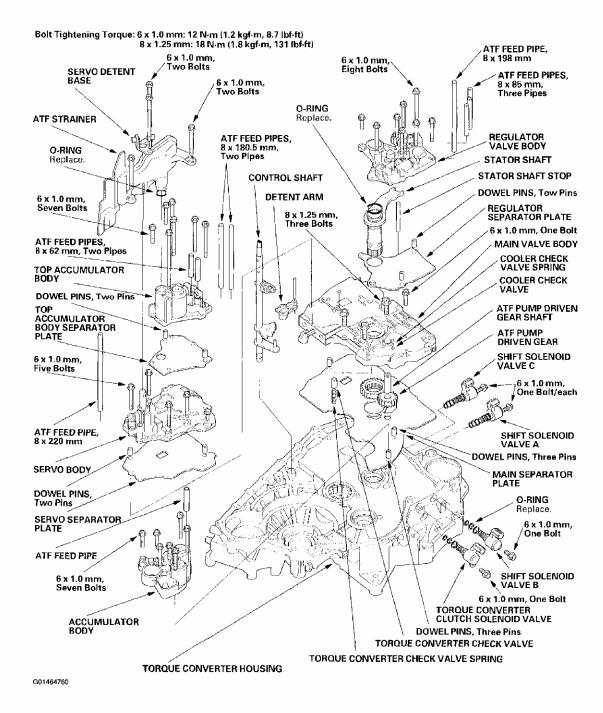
Exploded View Of Valve Body Courtesy of AMERICAN HONDA MOTOR CO., INC.
